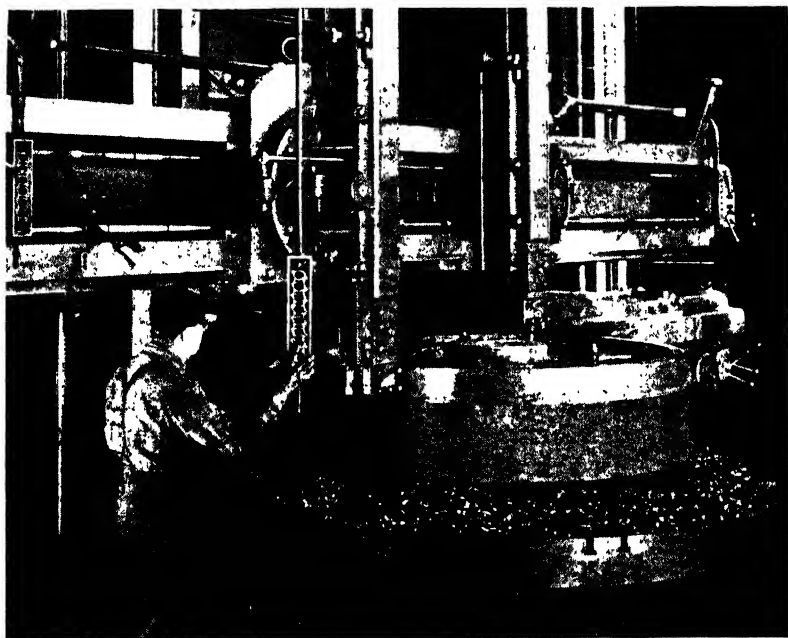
Machining Gear Casting on Vertical Boring Mill
